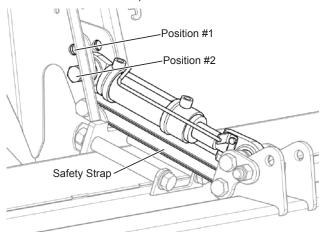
Short Hydraulic Tilt Cylinder (position #2 shown)
